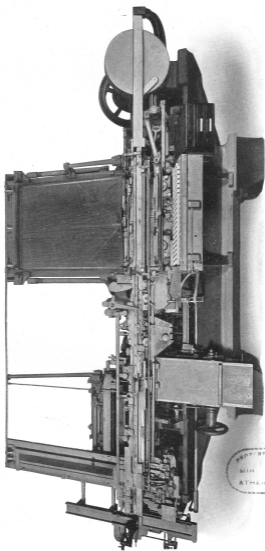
Frige composing, line-justifying, and distributing machine; general view.
